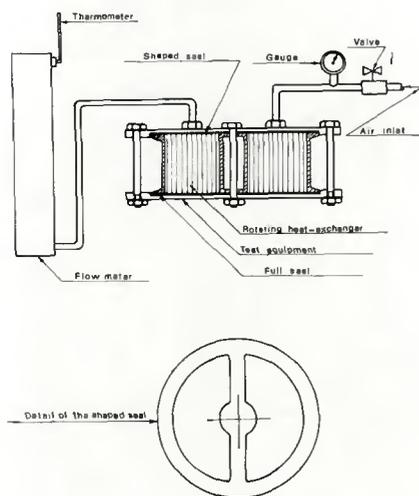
Sketch of the equipment for pressure tightness test on brazed rotating heat exchangers
